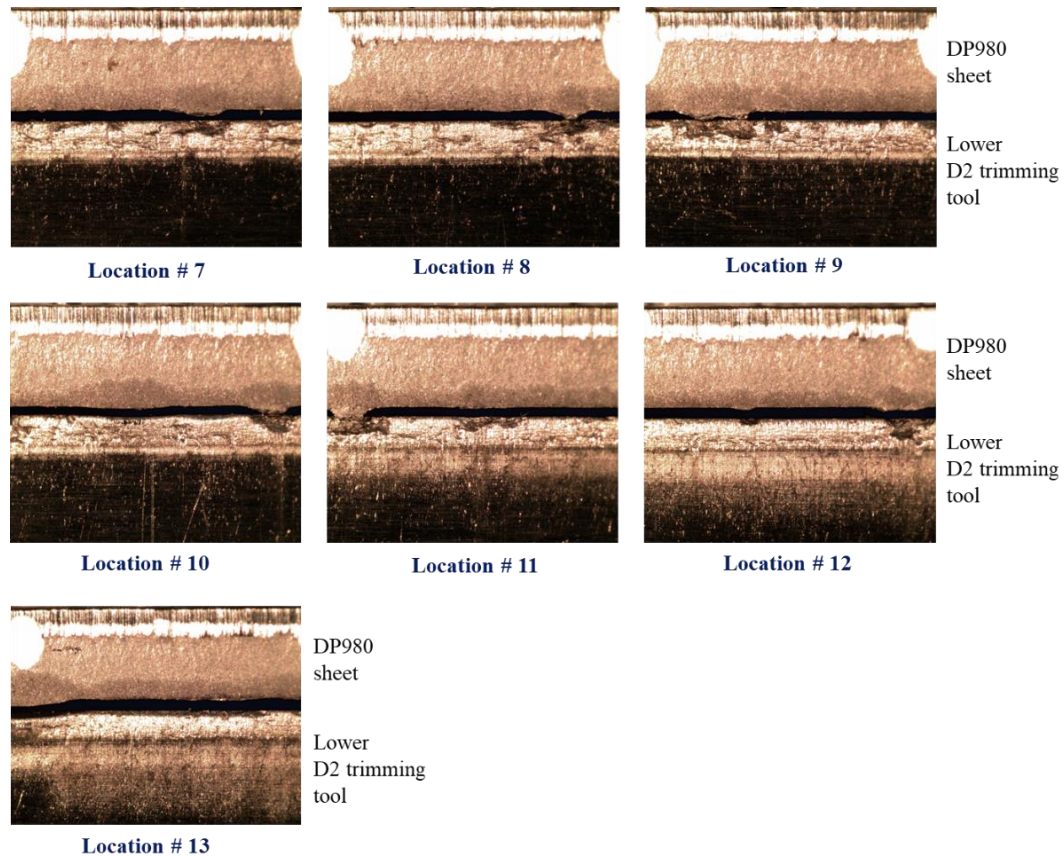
Optical views of the lower trimming tool after 230,000 cuts at designated locations 7 to 13. The trimmed DP980-1 blank is aligned above the die to visualize the correlation between local tool wear and burr formation
